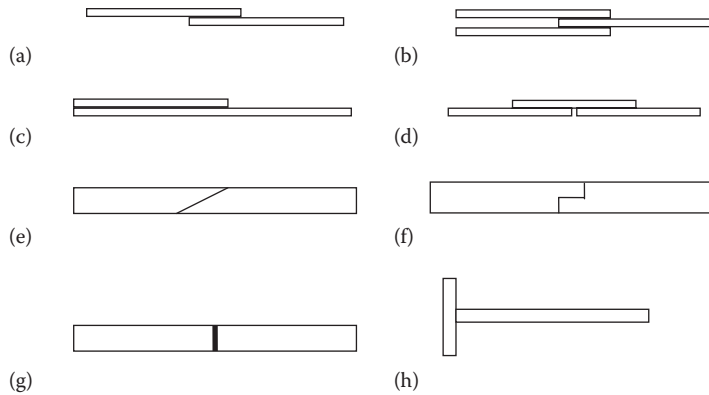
Typical joint configurations. (a) Single-lap joint (fastened, bonded, or combined), (b) double-lap joint (fastened, bonded, or combined), (c) lap-strap joint (fastened, bonded, or combined), (d) single-strap joint (fastened, bonded, or combined), (e) scarf joint (bonded), (f) stepped joint (fastened, bonded, or combined; stepped region varies), (g) butt joint (bonded), and (h) tee joint (fastened, bonded, or combined; tee region varies).
